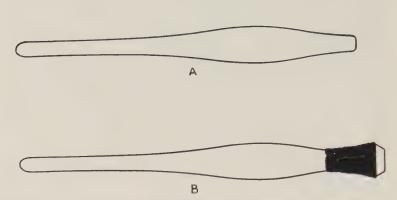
The Dop Stick For Facet Cutting. A, simple stick, made of boxwood and shaped to fit the hand; B, stick with properly mounted, preformed gem.
